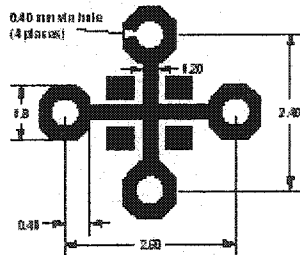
PCB Pad Layout, High Isolation MiniPak (dimensions in mm).
